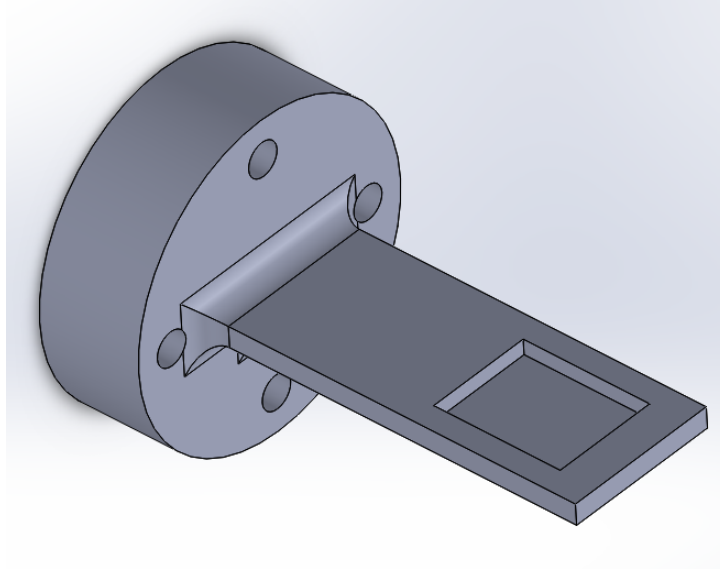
Vibrating platform that connects to the mechanical vibrating machine.
